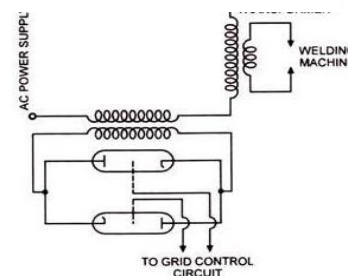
Valve Controlled Resistance Welding Circuit
